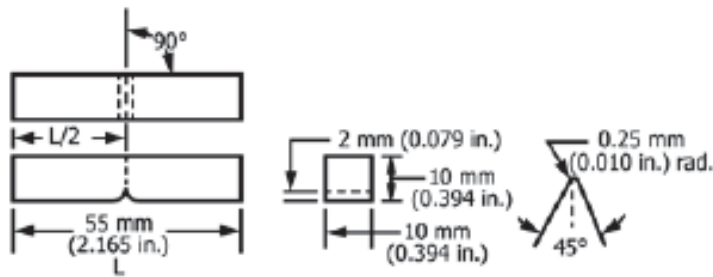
ASTM E370 standard dimensions for Charpy V-notch specimens [60]
